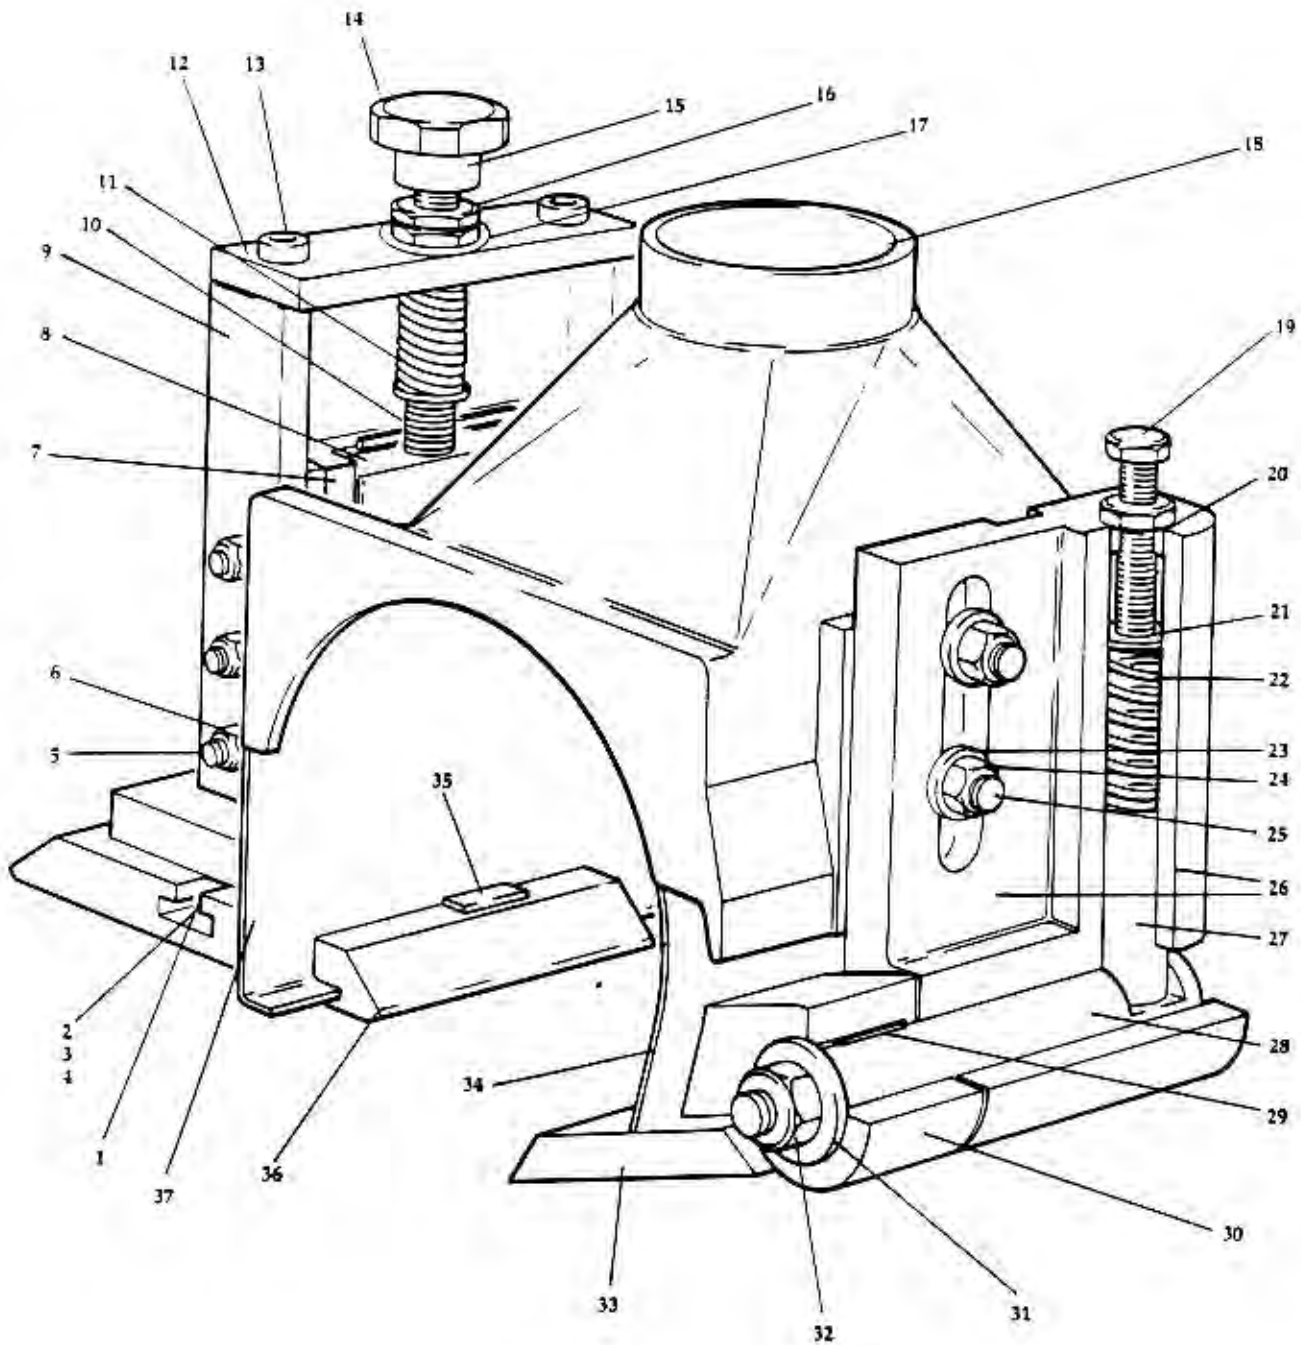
TOP HEAD CHIPBREAKER, PRESSURE PAD AND EXTRACTION HOOD
